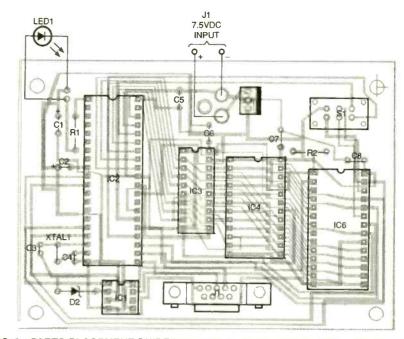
PARTS-PLACEMENT GUIDE for the EEP-1. Don't solder the ZIF socket directly to the board in the IC6 location; instead, install a machined-pin socket, and insert the ZIF socket into that.
